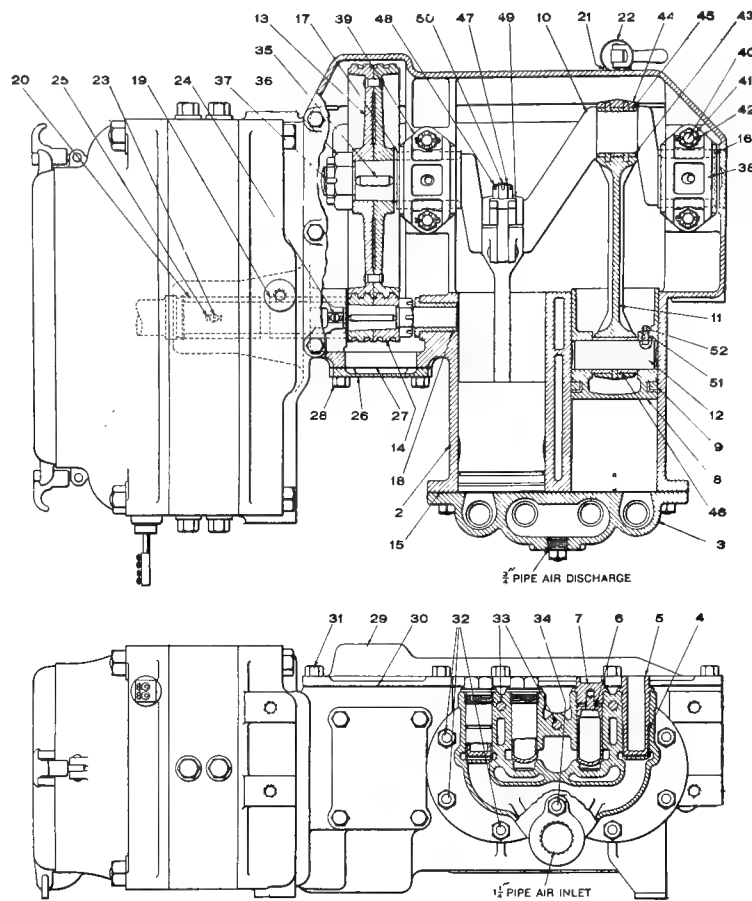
Type D-1-H Motor Driven Air Compressor. See also Fig. 1405.
